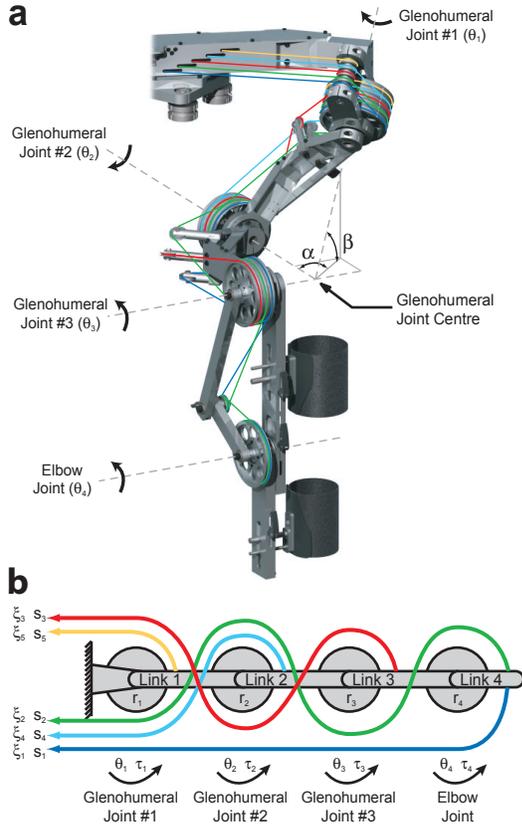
The shoulder/elbow mechanism is cable-driven. (a) A CAD drawing of the mechanism showing the final joint orientations and cable system. (b) A simplified planar schematic representation of the optimal cable routing structure. Each of the five cables is denoted by a different colour. Each joint has a separate pulley for each cable that passes by the joint. Symbols  $s$ ,  $\xi$ ,  $r$ ,  $\tau$  and  $\theta$  represent cable displacement, cable force, pulley radius, joint torque and joint angle respectively.
